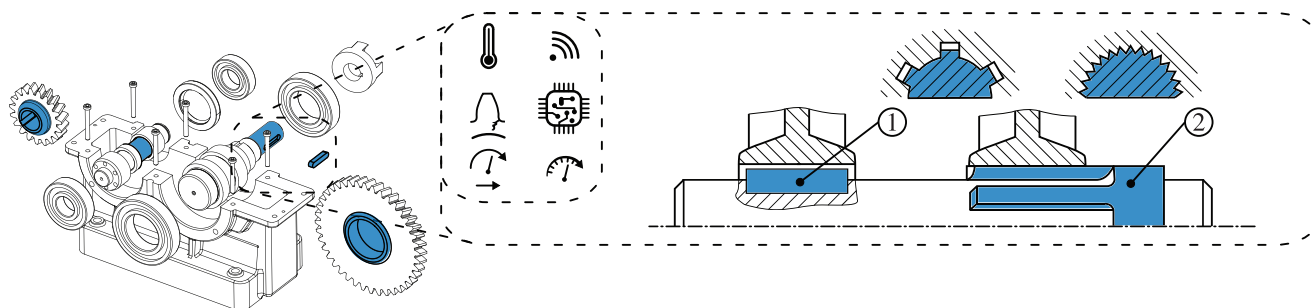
Sensor-integrating gear box, focusing on sensor-integrating shaft-hub connection and their measuring task exemplified by a key (1) and a spline shaft (2).
